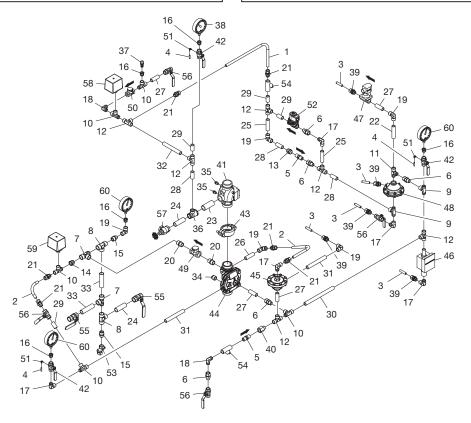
(2 OF 6) DN50 DV-5 PREACTION TYPE A TRIM ASSEMBLY EXPLODED VIEW
